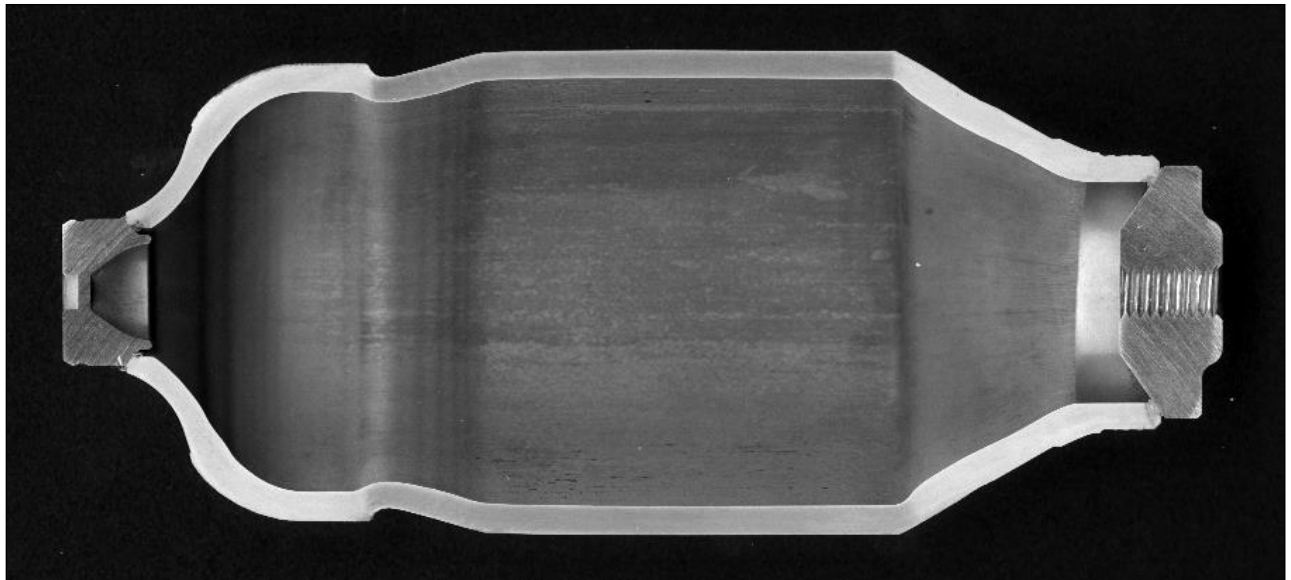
transformed cold gas cylinder with welded plug (right) and welded support of the membrane (left).
